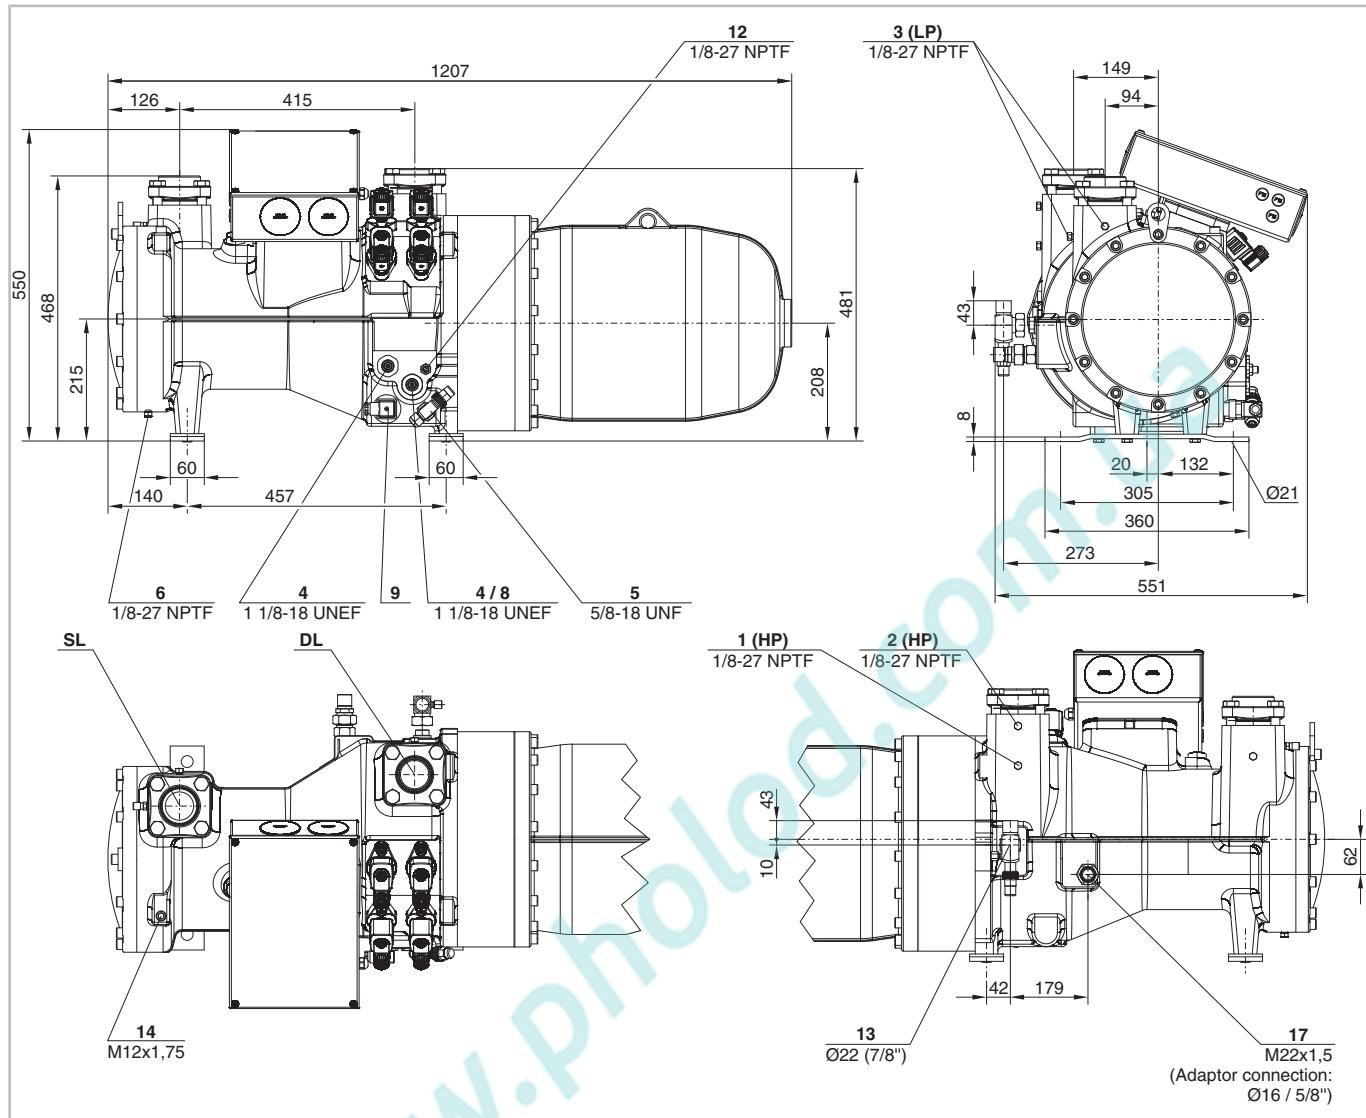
Dimensional drawing CSW6583-40Y .. CSW6593-60(Y)
